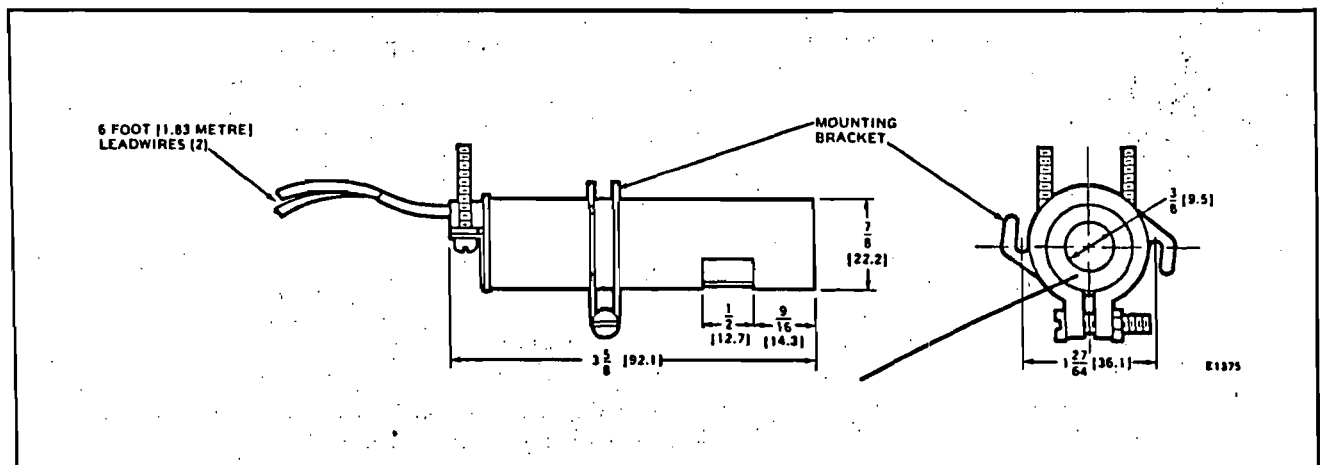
INSTALLATION DIMENSIONS OF THE C7044A, IN in. [mm IN BRACKETS].
